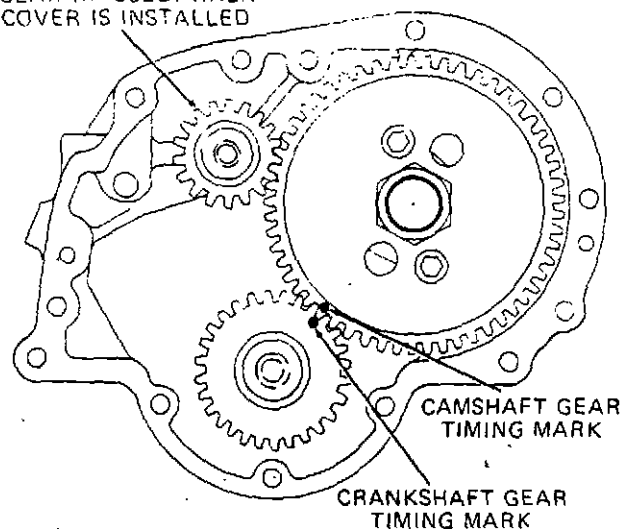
Aligning Camshaft and Crankshaft Gear Timing Marks
